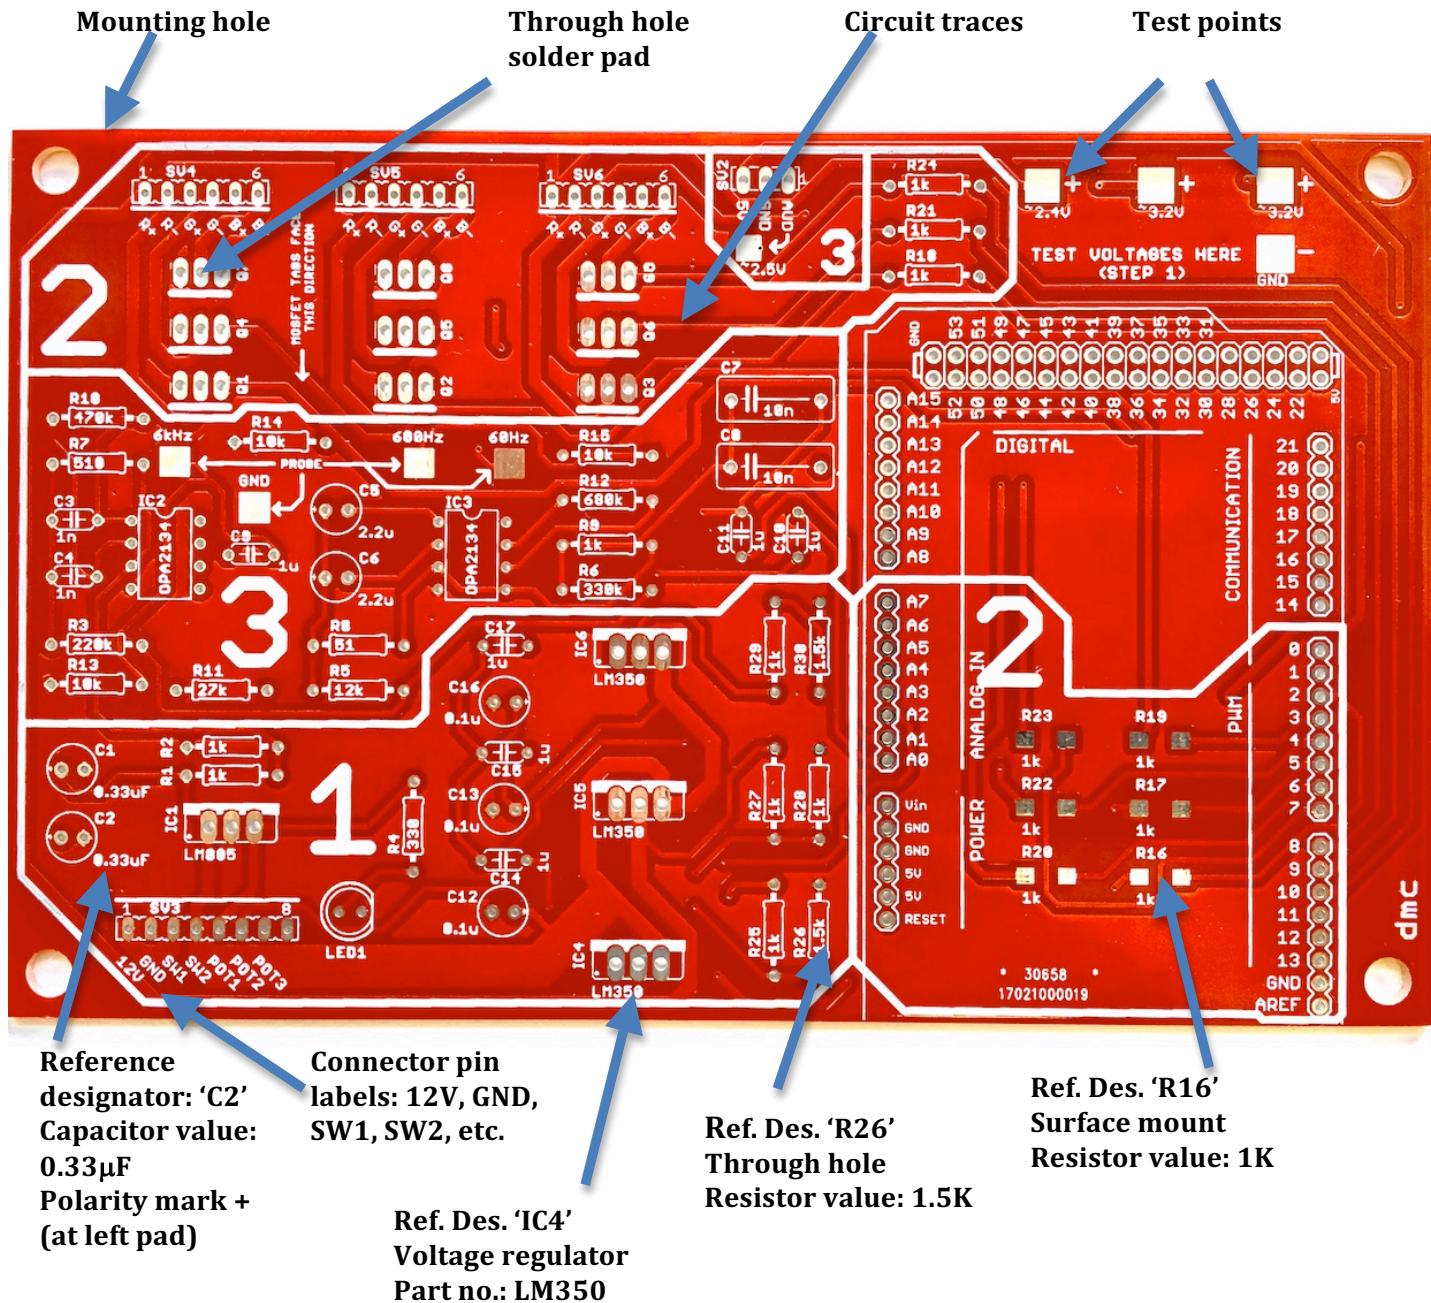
Prism lab project main board with several important features identified. This is a *mixed* assembly PCB – meaning it has mostly through holes, but also a few surface mount pads in Region 2.
